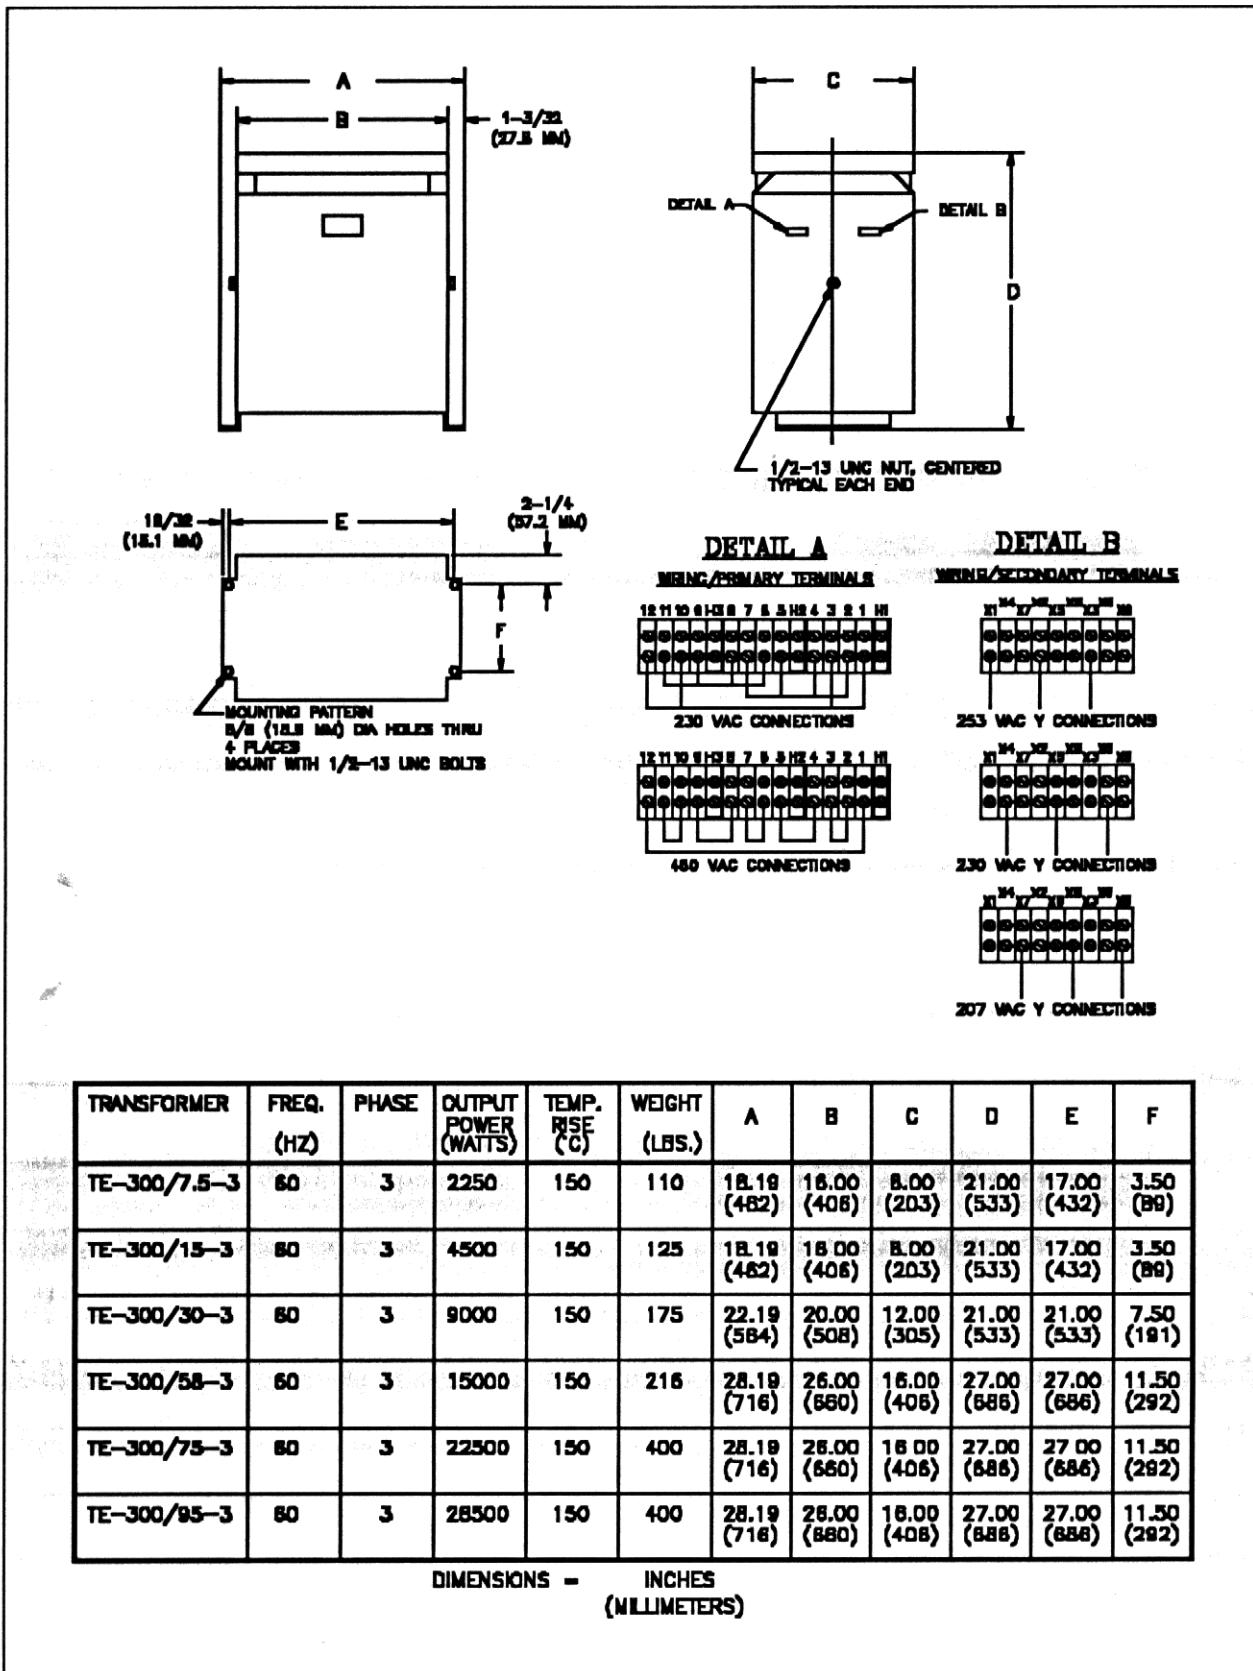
Free-Standing Transformer Dimensions and Connections
